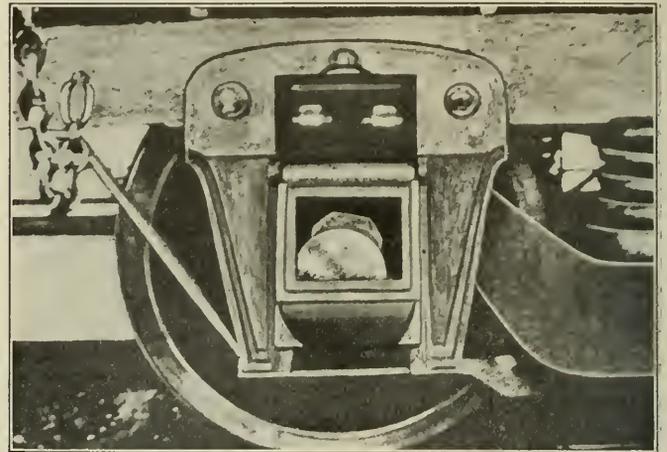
Tilting and Displacement of Brasses and Journals with Single Shoe Brake; Four-Wheel Truck
